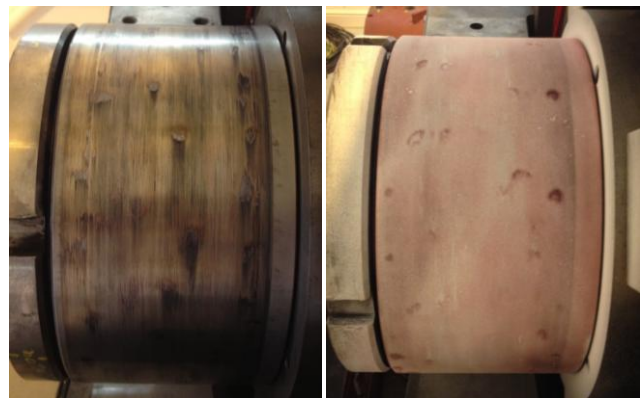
NDE Sleeve after Dye Penetrant Inspection
